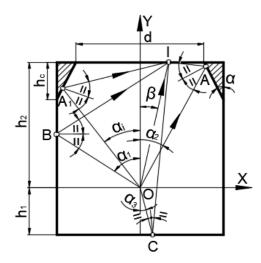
Cylindrical discharging chamber with ring-shaped pressure concentrator.
